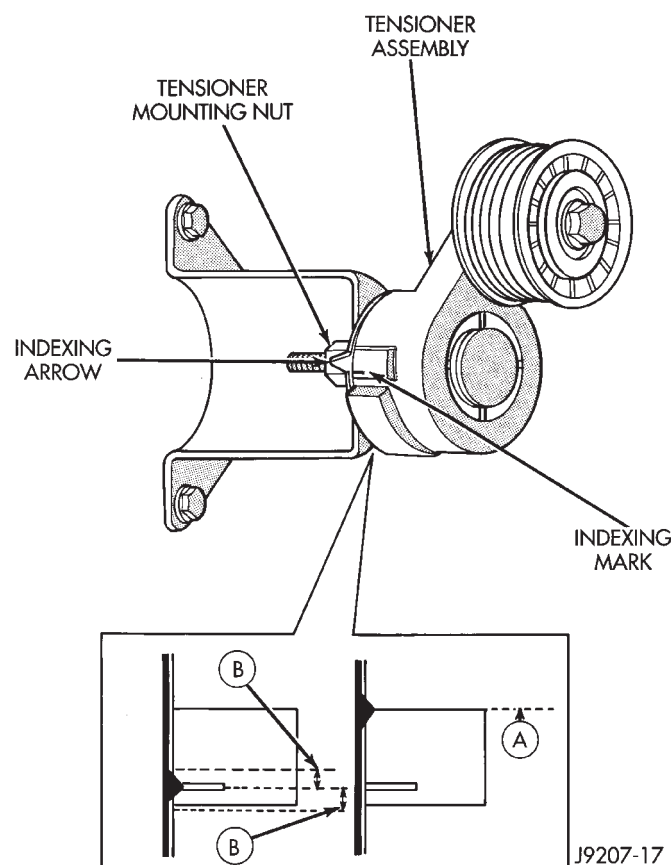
Automatic Belt Tensioner/Pulley Assembly—3.9L/5.2L/5.9L Engine
